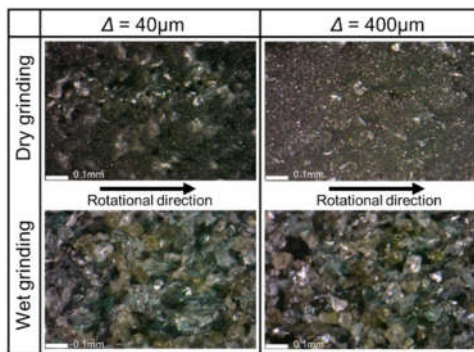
Wheel surfaces after grinding (fiber angle of $\theta=90^\circ$)
